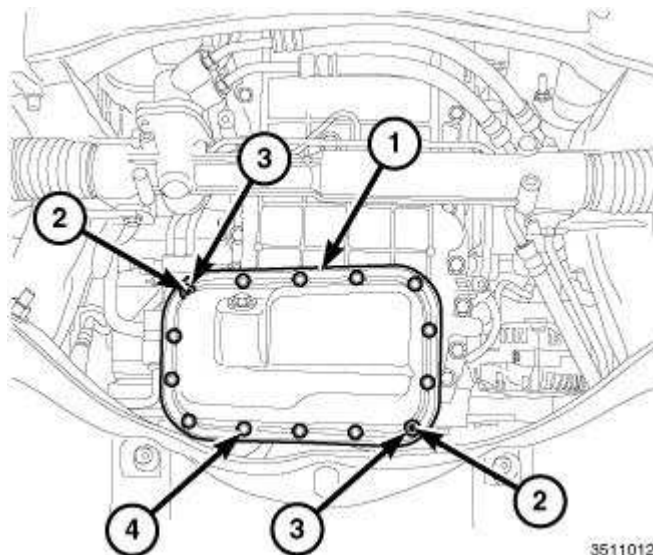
Bolts, Studs, Nuts & Lower Oil Pan
